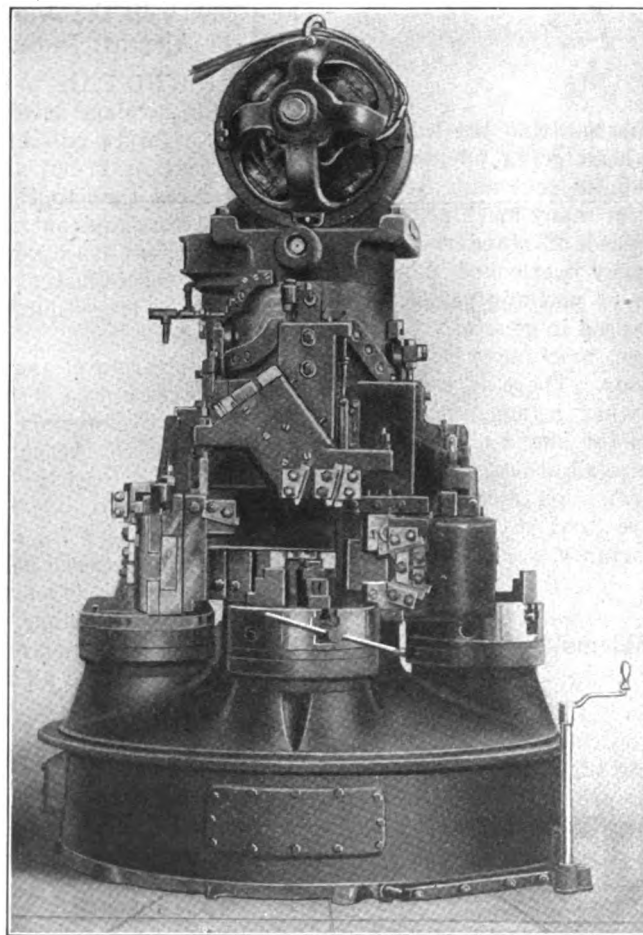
BULLARD CONTINUOUS TURNING MACHINE
